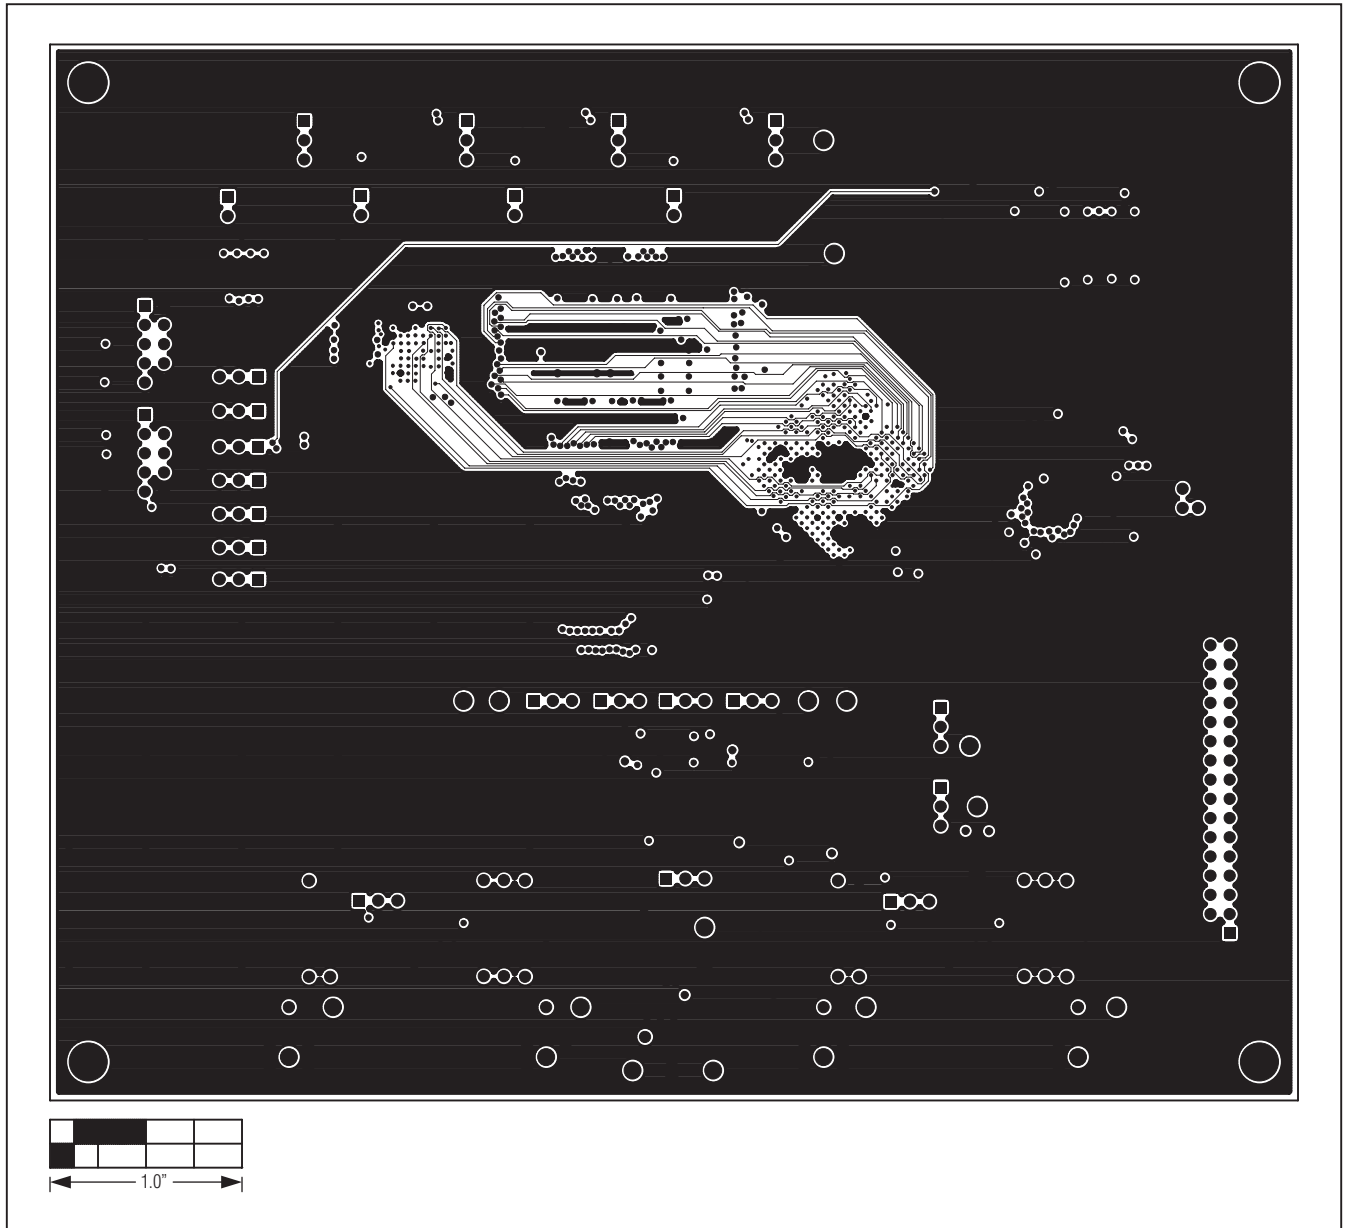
MAX11666 EV Kit PCB Layout—Layer 6
